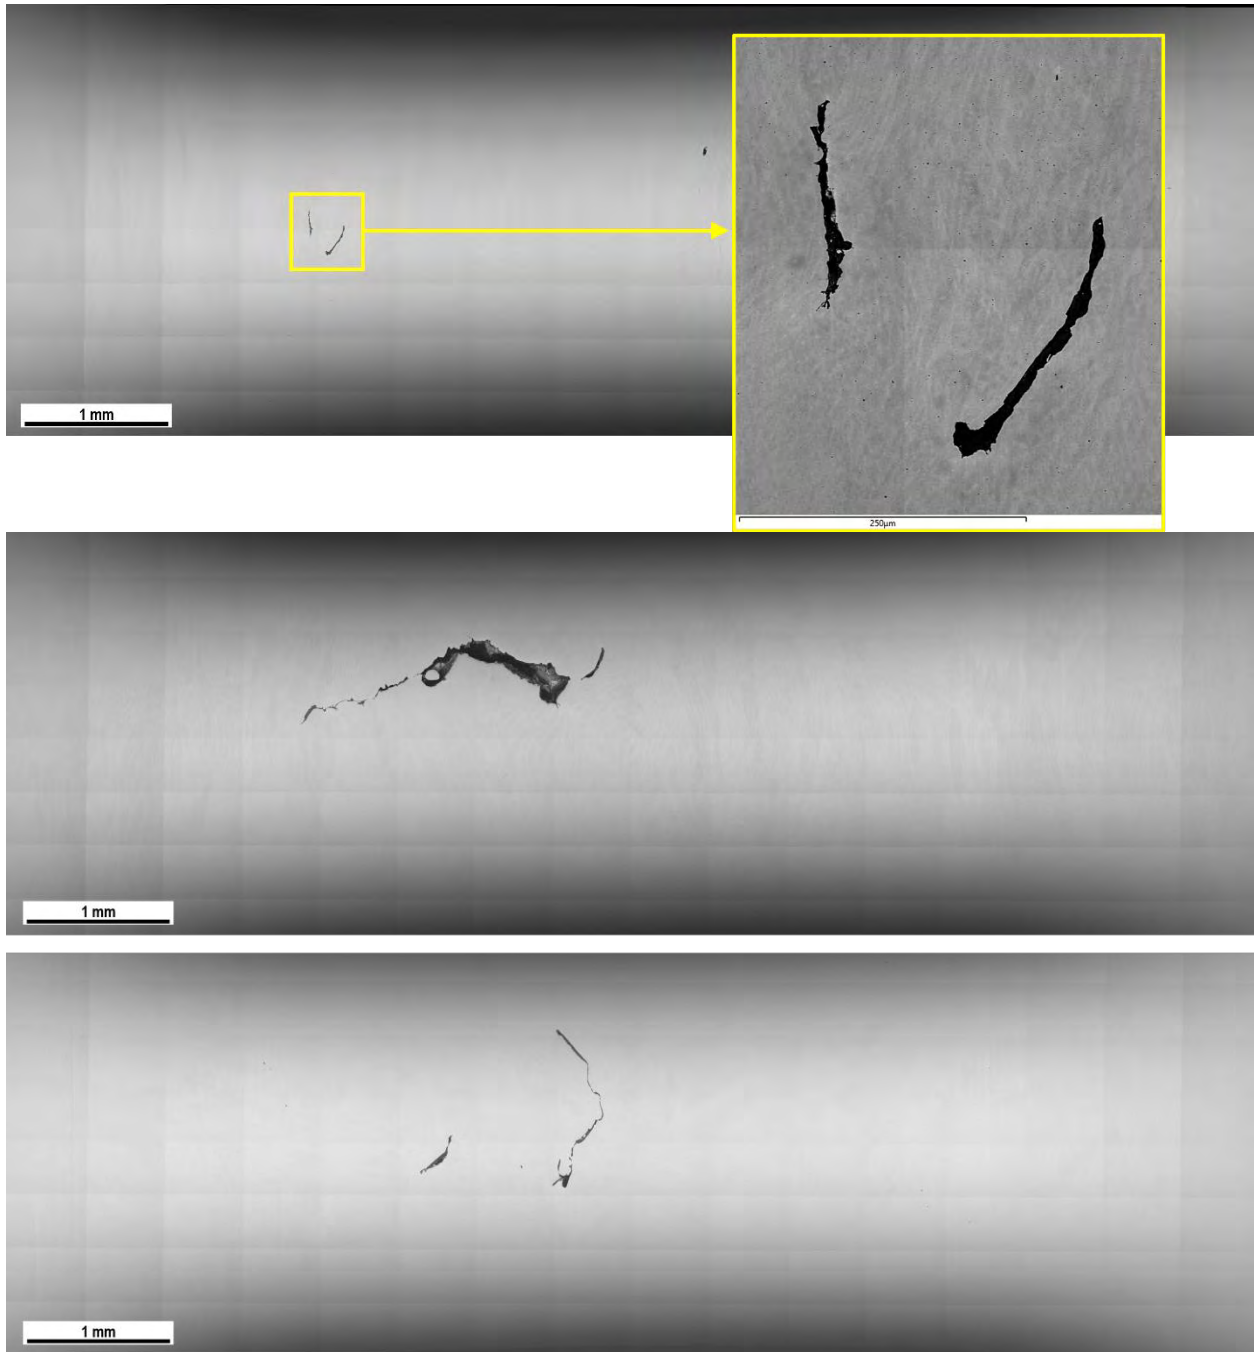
Examples of pre-existing welding defects observed on the gauge surface of several 30% CF Alloy 82 initiation specimens after they were polished to a colloidal silica finish.
